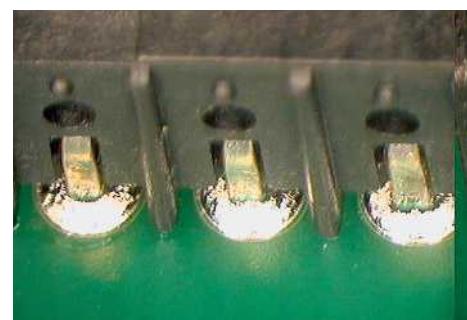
Soldering spot on the primary side of the PCB: perimeter wetting and soldering pad wetting in accordance with standard
